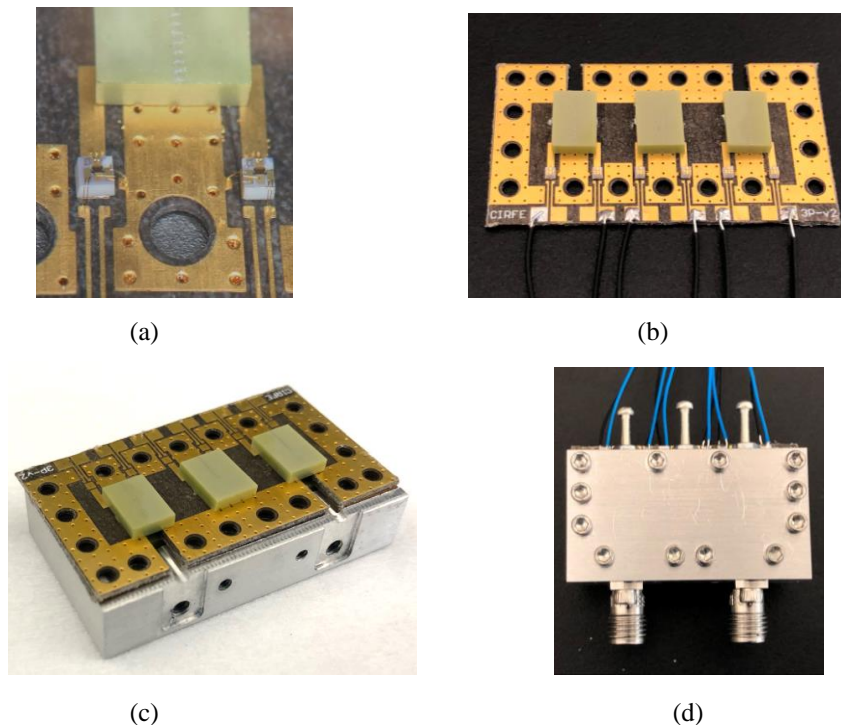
Image of fabricated three-pole tunable filter: (a) VO₂ switch on PCB; (b) full image of DSs and VO₂ switch assembled on PCB; (c) PCB on a cover; (d) assembled filter
